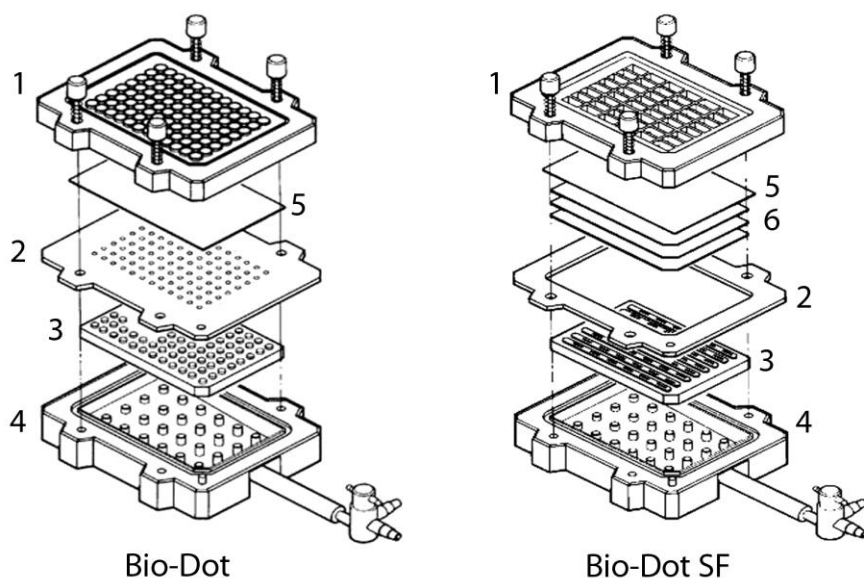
Schematic diagrams of the Bio-Dot[®] and Bio-Dot[®] SF apparatus assemblies (Bio-Rad). (1) Sample template; (2) gasket; (3) gasket support plate; (4) vacuum manifold; (5) membrane; (6) filter paper (three sheets). Figure adapted from Bio-Rad apparatus instruction manuals (53, 54).
